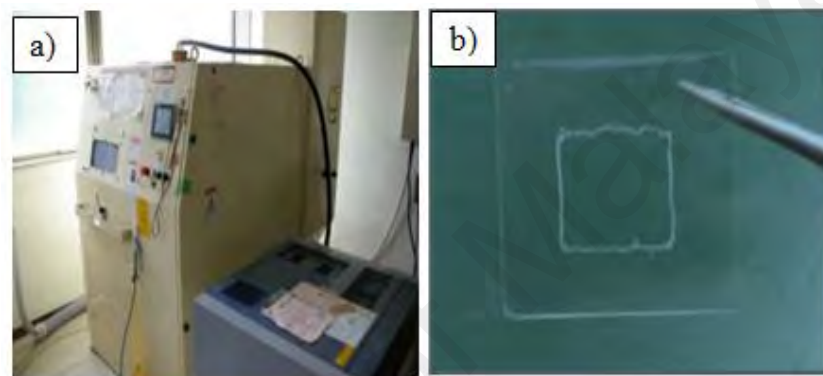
a) SHINTO Sand blast machine b) Glass with hole patterned after sand blasting process
